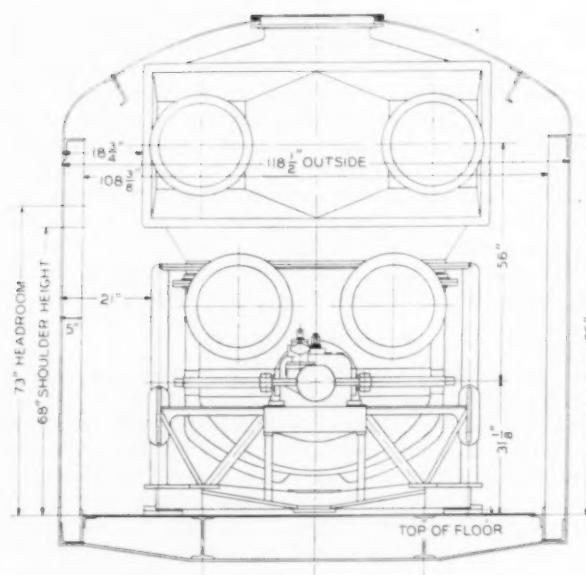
SECTION THROUGH LOCOMOTIVE CAB
